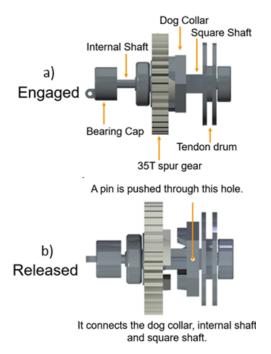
3D models of the quick release mechanism developed for the passive closing, adaptive robot hand. Subfigure a) presents the mechanism in *Engaged* configuration where the dog collar is in contact with the spur gear through the internal shaft allowing rotation of the tendon drum to open the gripper, while Subfigure b) presents the mechanism in *Released* configuration where the internal shaft has disengaged the dog collar from the spur gear.
